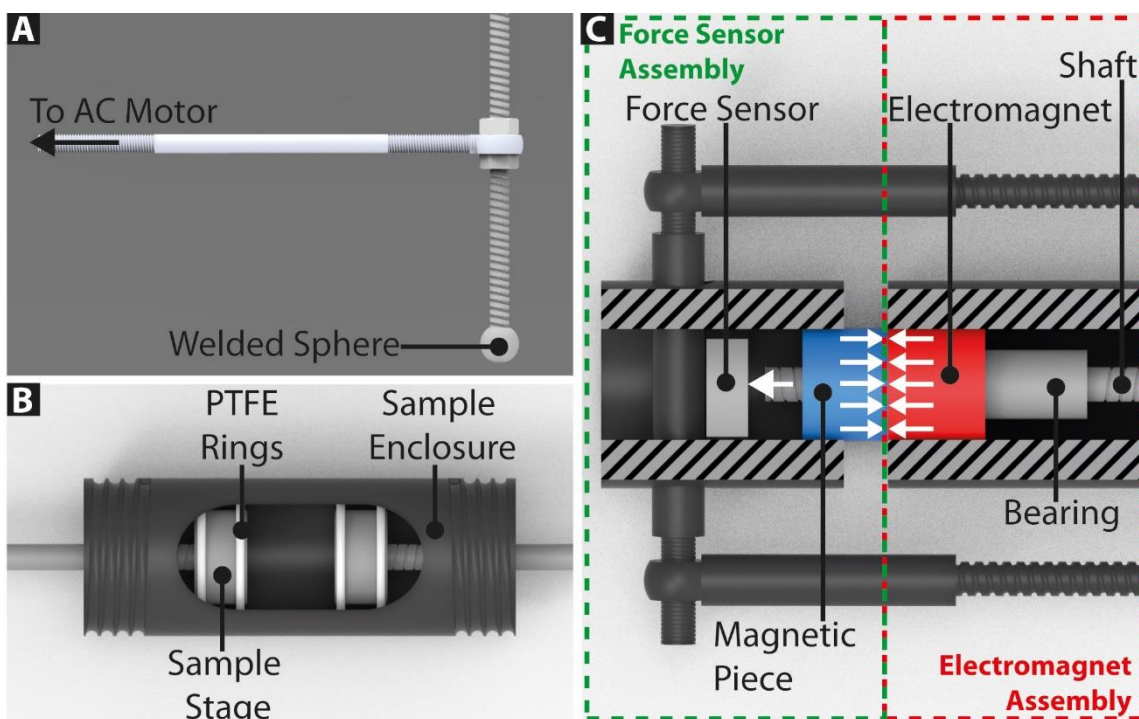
Various Assemblies in the reactor. A) Sphere welded to a vertical shaft. The horizontal shaft is powered by an AC motor. B) Sample enclosure containing sliding sample stages. Teflon rings minimize friction due to sliding. C) Force control assembly containing electromagnet and a magnetic piece. When the shaft hits the force sensor, it overcomes the holding force and pushes the magnetic piece away. Simultaneously, the force sensor records the impact with microsecond time resolution. Hatched areas represent cutaway.
